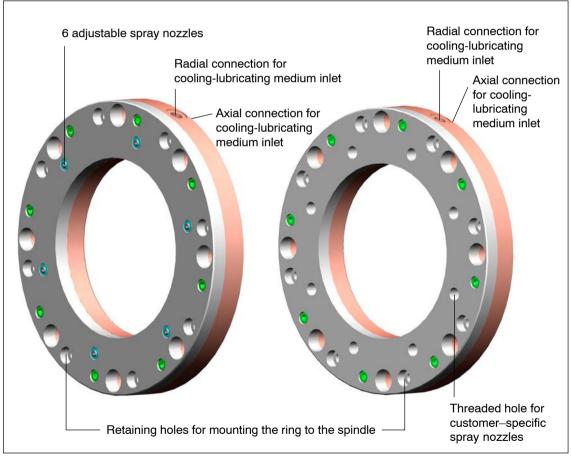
Lefthand side: Ring with the adjustable spray nozzles for the external tool cooling; Righthand side: Ring with threaded holes to screw–in spray nozzles or chain elements for the external tool cooling
